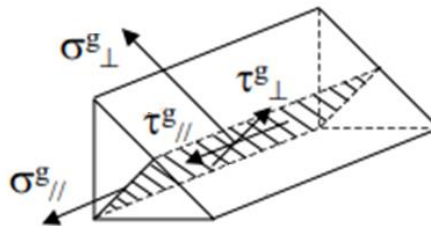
Definition of the stresses on the throat section of a fillet weld.
